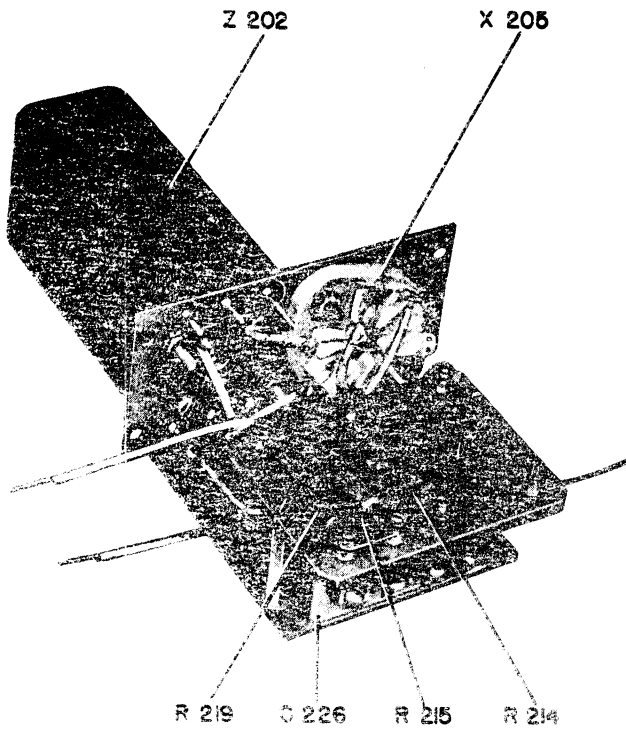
Receiver 2nd I-F Assembly—Bottom View
